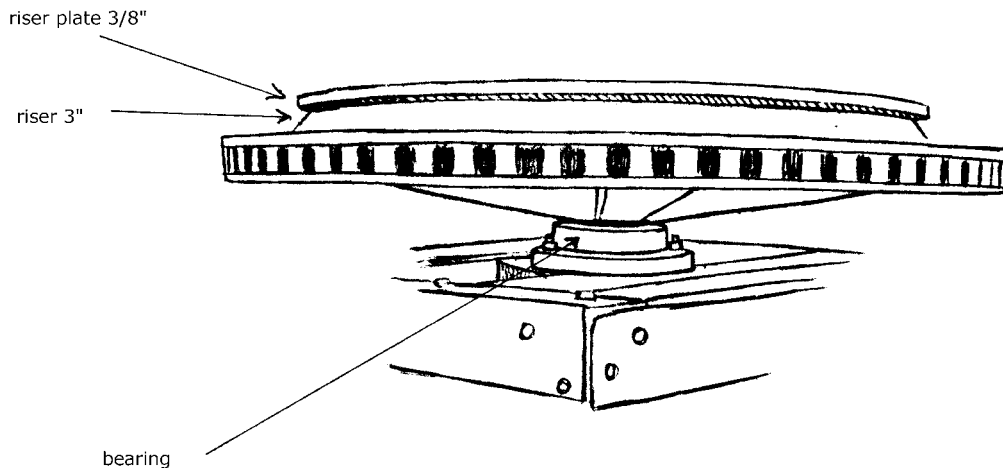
Detail of master sprocket, showing riser and riser plate.
